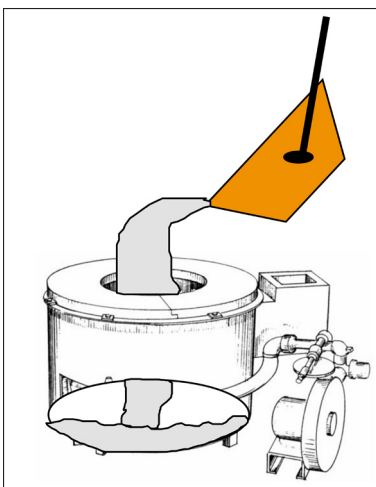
Holding furnace run too low and large charge needed to replenish it
